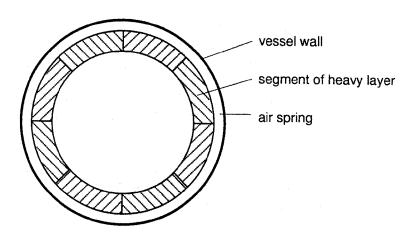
Sketch of the design concept. A pressure vessel has a heavy internal layer, which is supported on the vessel wall by springs (in this example air springs)
